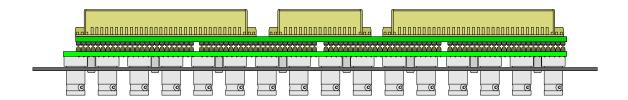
Side View of the Integrator High Definition Backpanel Assembly
